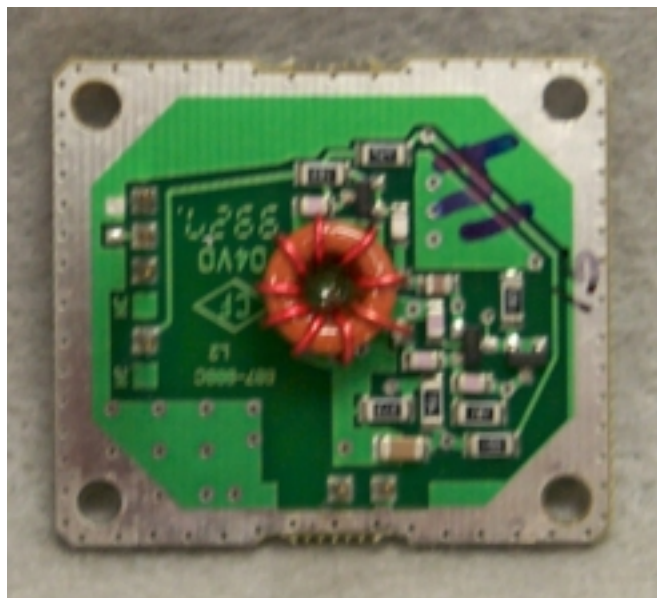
EUT, Bottom View of Main Chassis with Case Removed Showing System Board
